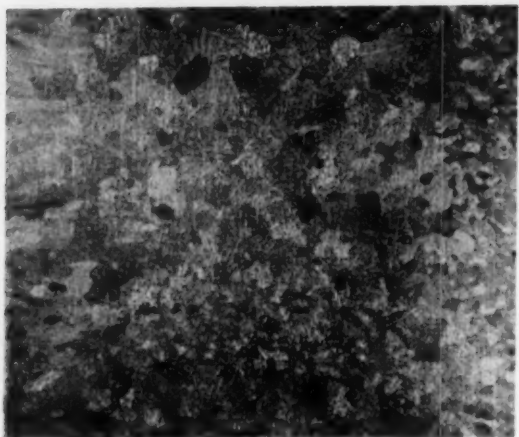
Macrostructure of sand cast 9 in. cylinder of section 4 in. wide x 4 in. high.
